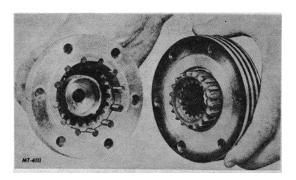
Clutch Body and Hub Body Properly Assembled (Manual Type)
